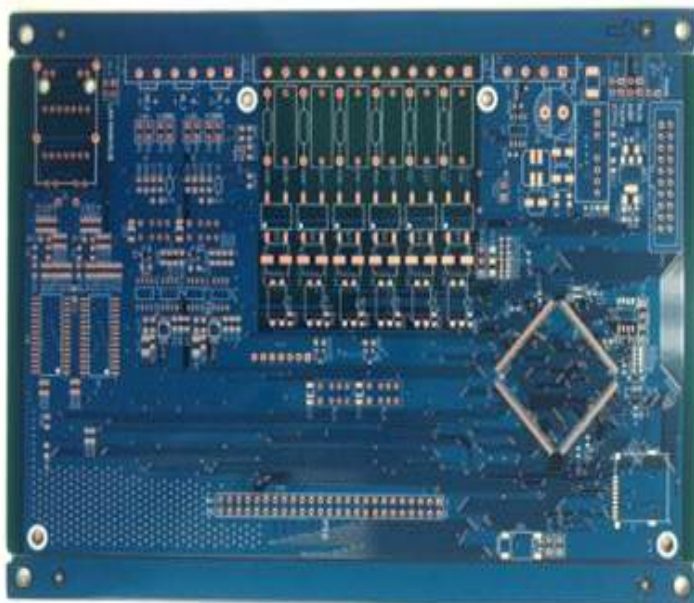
PCB photo on the left side of the SYSTEM(b)
